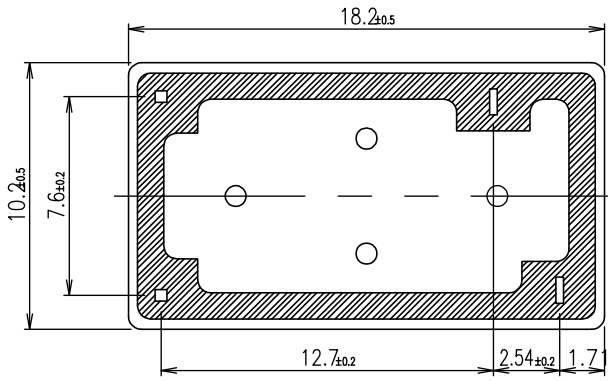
FIGURE FOR PRINTED CIRCUIT BOARD PROCESSING (BOTTOM VIEW)
